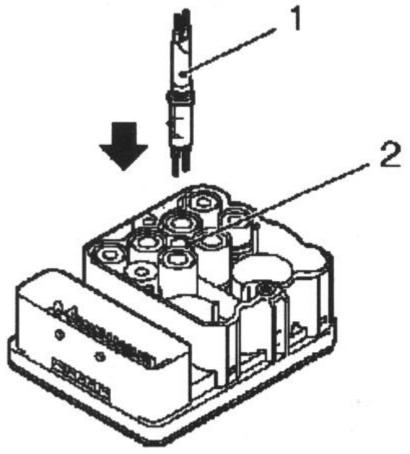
Setting adapter: 1 - Adapter 2 - slide
